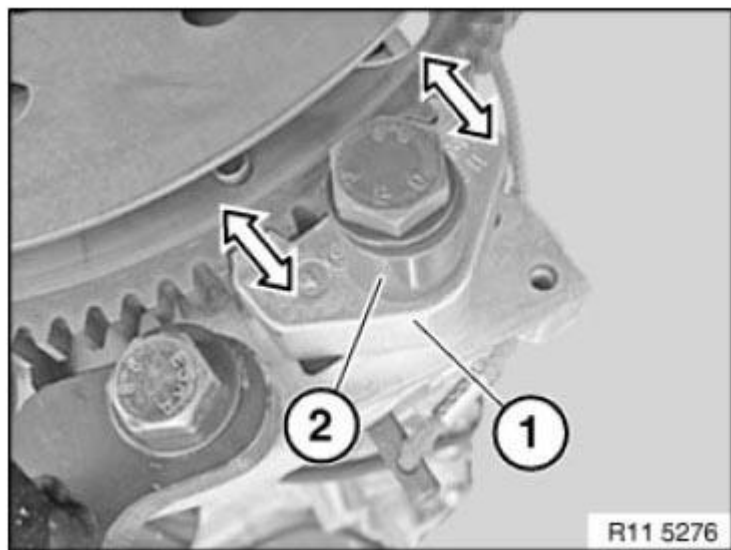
Securing Flywheel Using Special Tool 11 9 260 And Special Tool 11 9 266
